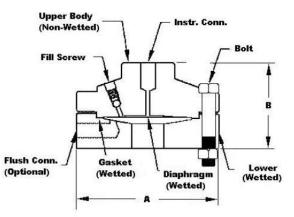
Seal Dimensions (Threaded Process Connection Seals)
